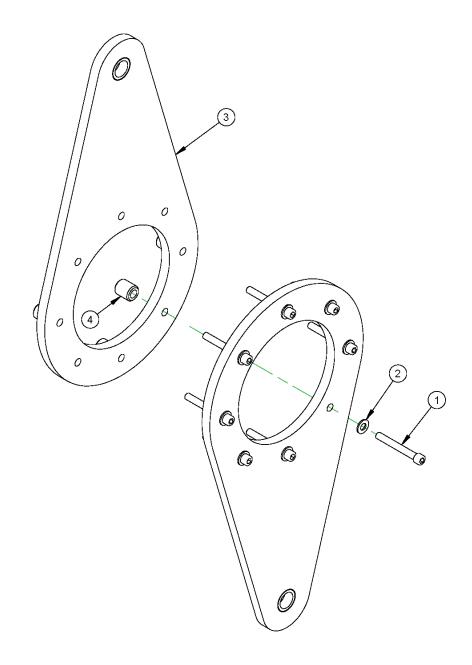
BORING DIAMETER RANGE STACK-UP BLOCKS ASSEMBLY PARTS LIST (P/N 81249)
